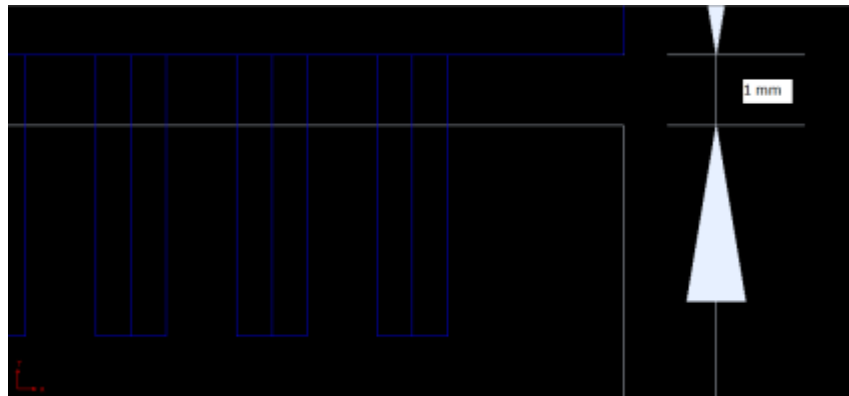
The closer view of arrays and pores which shows the mold gives the 1 mm silicone film
